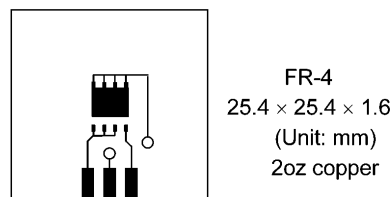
Device Mounted on a Glass-Epoxy Board (b)
